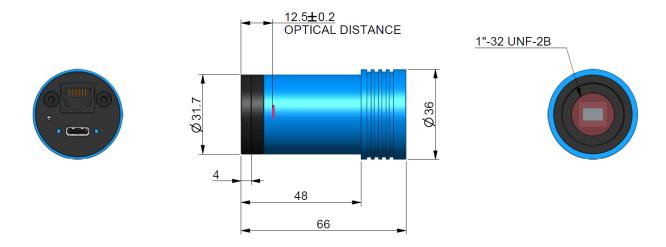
Dimension and Mount of GPM462C and 1.25" extender
